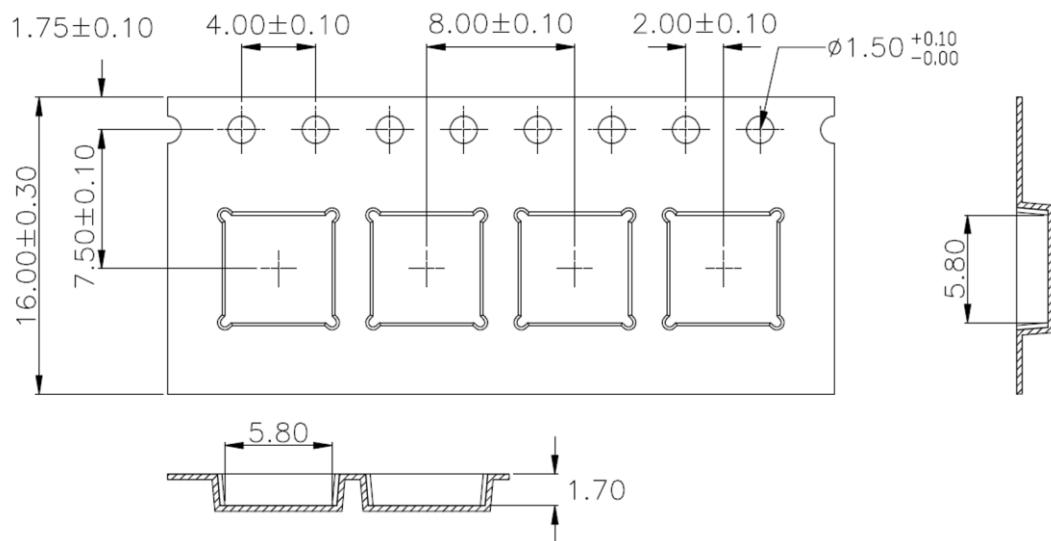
$5.5 \times 5.5 \text{ mm}^2$ Tape Dimension (for package height 1.4 mm)
